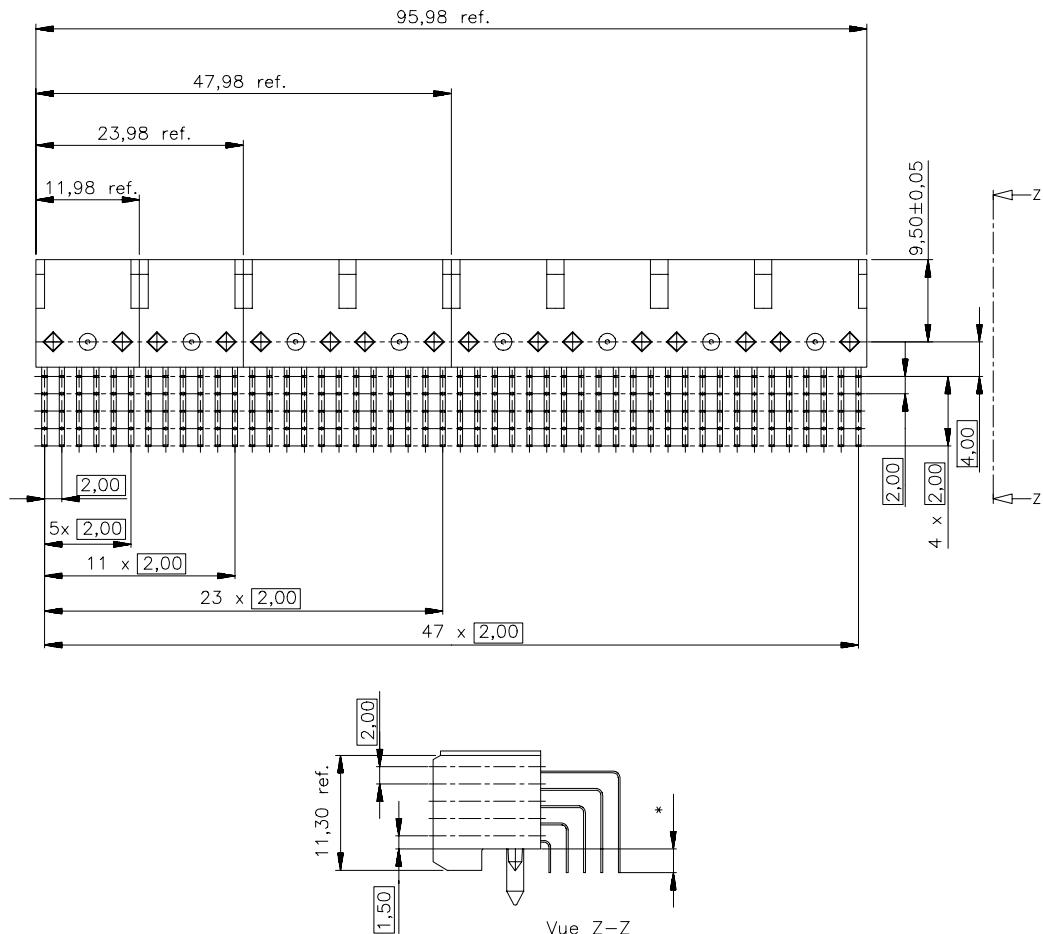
Mounting for free board connector module, special contacts, solder termination
